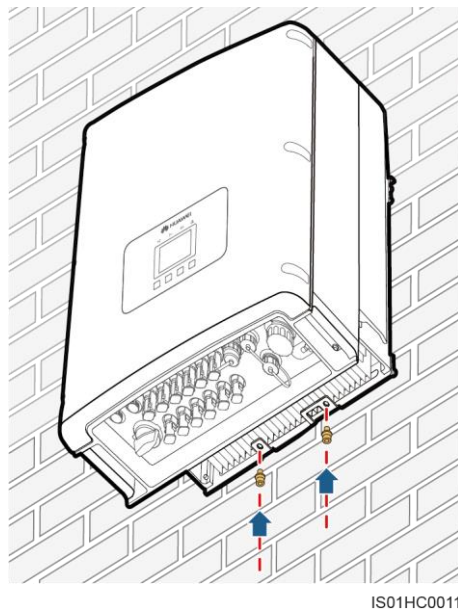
Mounting the SUN2000 on the rear panel (rear view)
